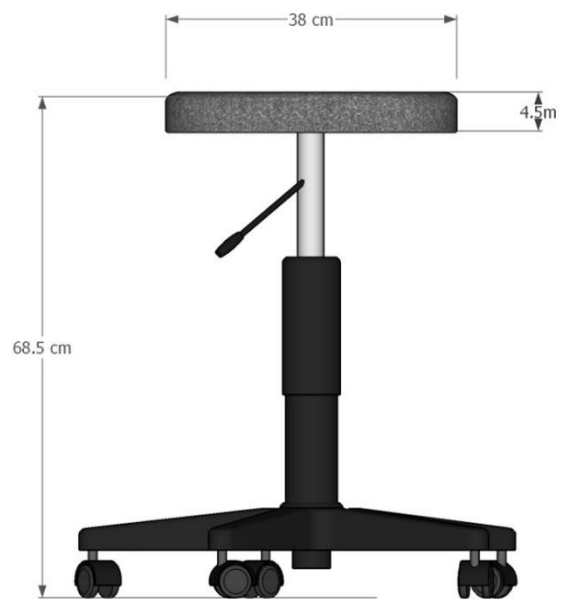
Gazi University, industrial design studio drafting table and stool's technical drawing with dimensions.
